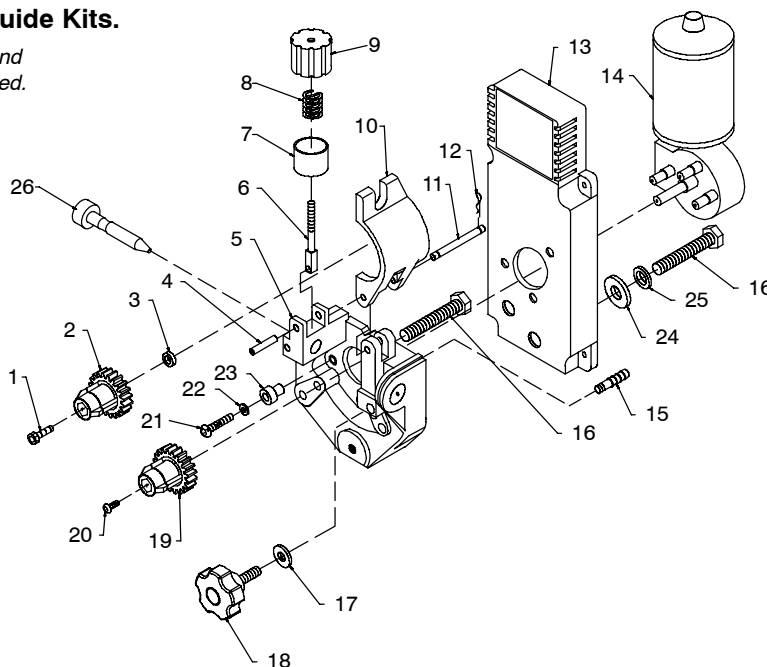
Wire Drive And Gears (Eff w/LF430261B)
